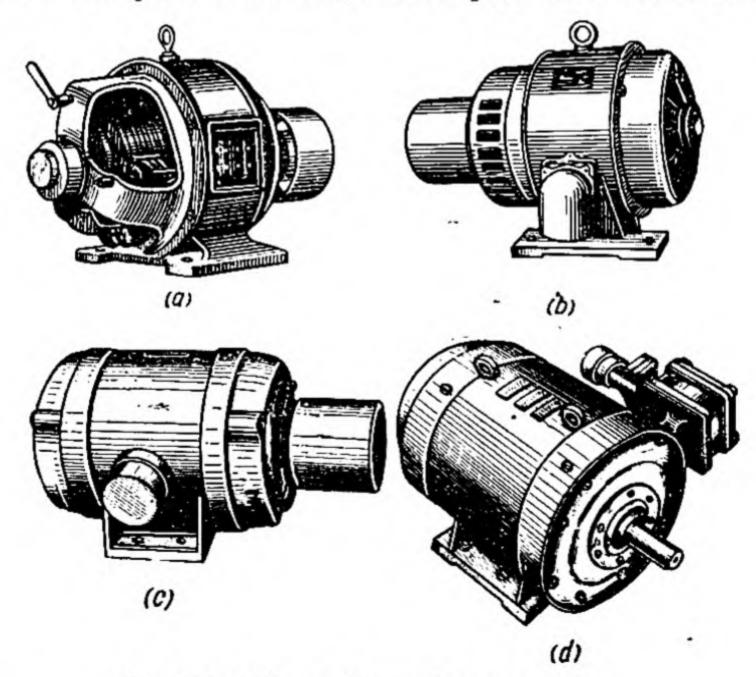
Different forms of electric motors: a - open motor, b - protected motor, c - dripproof motor, d - flameproof motor.
